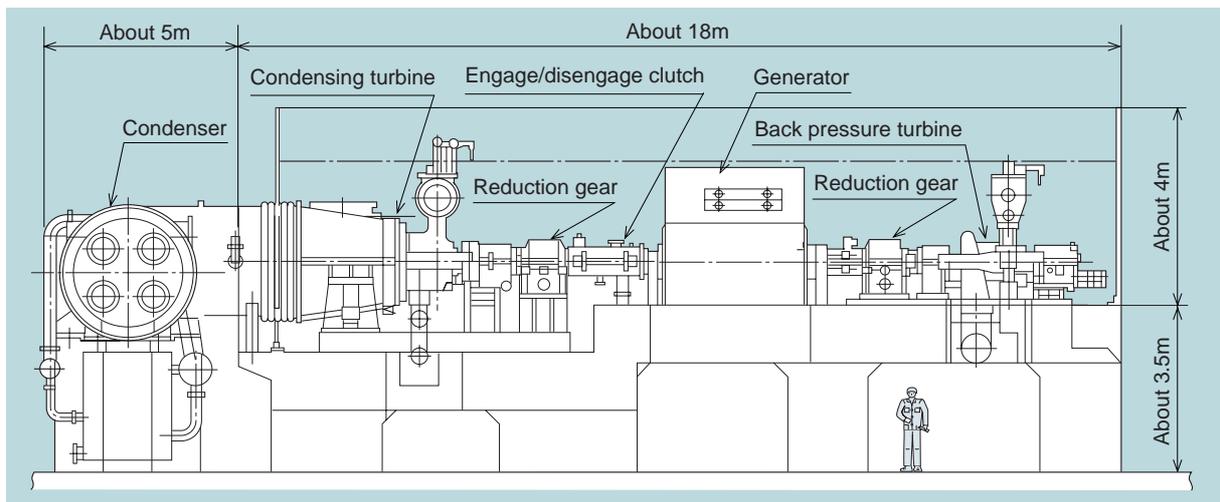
Outline drawing of 21 000 kW tandem steam turbine
